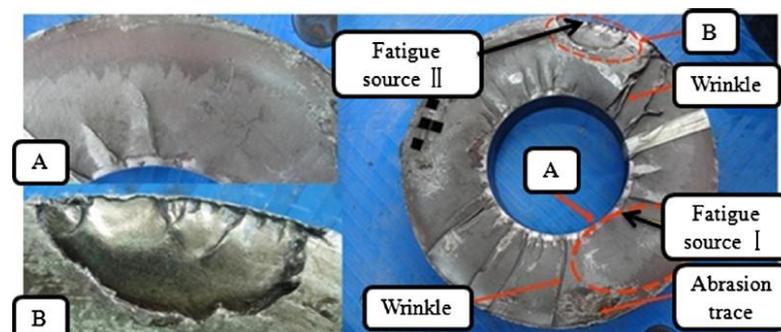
Macro-photograph of the fracture surface of the shaft (Zhang et al. 2013).
